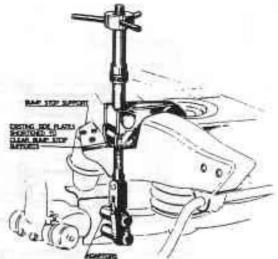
SPRING COMPRESSION TOOL IN POSITION.
